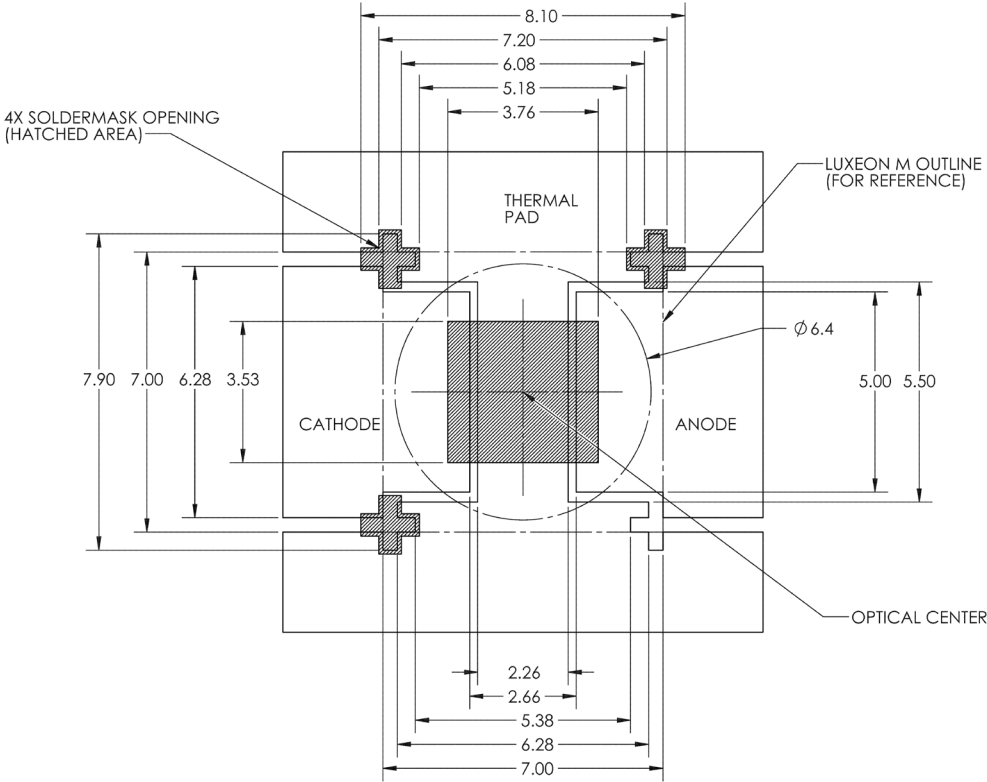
Recommended PCB solder pad layout for LUXEON M.
